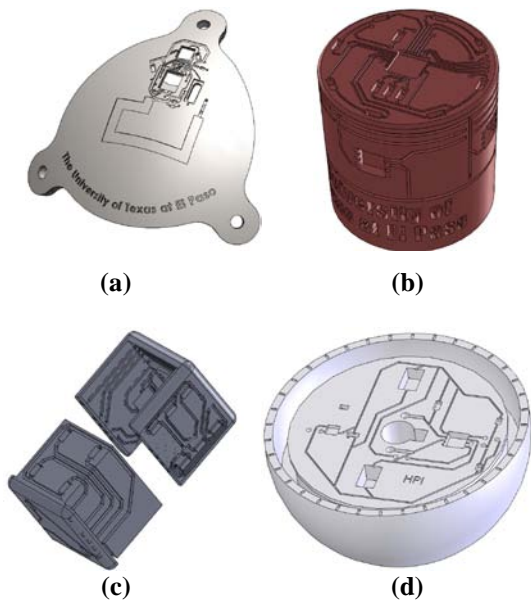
Completed models of the helmet insert (a), magnetometer (b), rolling dice (c) and floating sensor (d).
